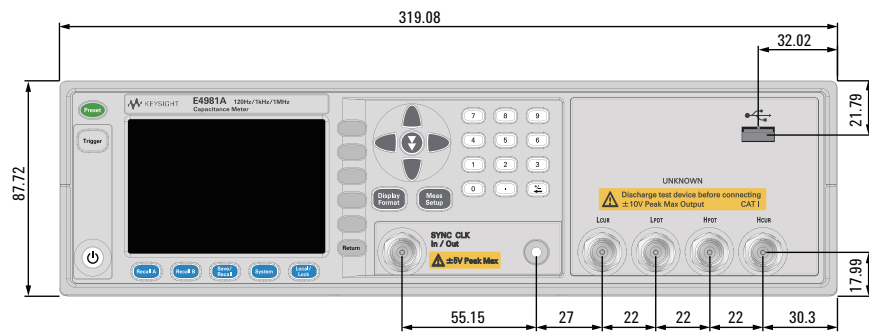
Dimensions (front view, without handle and bumper, in millimeters, nominal)
